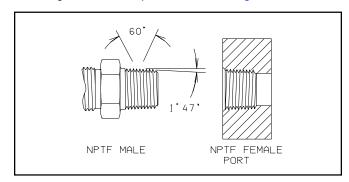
Dryseal American Standard Taper Pipe Thread, NPTF
